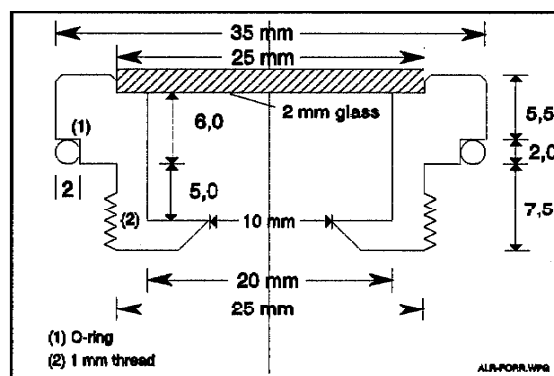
The aperture assembly used with the SolData pyr heliometers is mounted on the front of the collimator tube.
